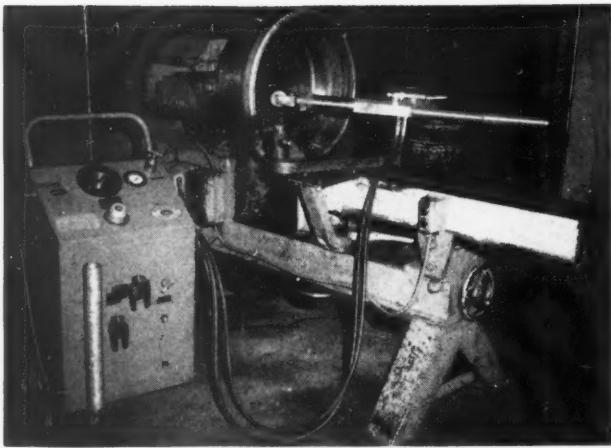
This illustration shows a hydraulically operated spinning tool built by the El Segundo Division of Douglas Aircraft Company to provide high pressure for "flowing" the metal against the spinning chuck without loss of "feel."
